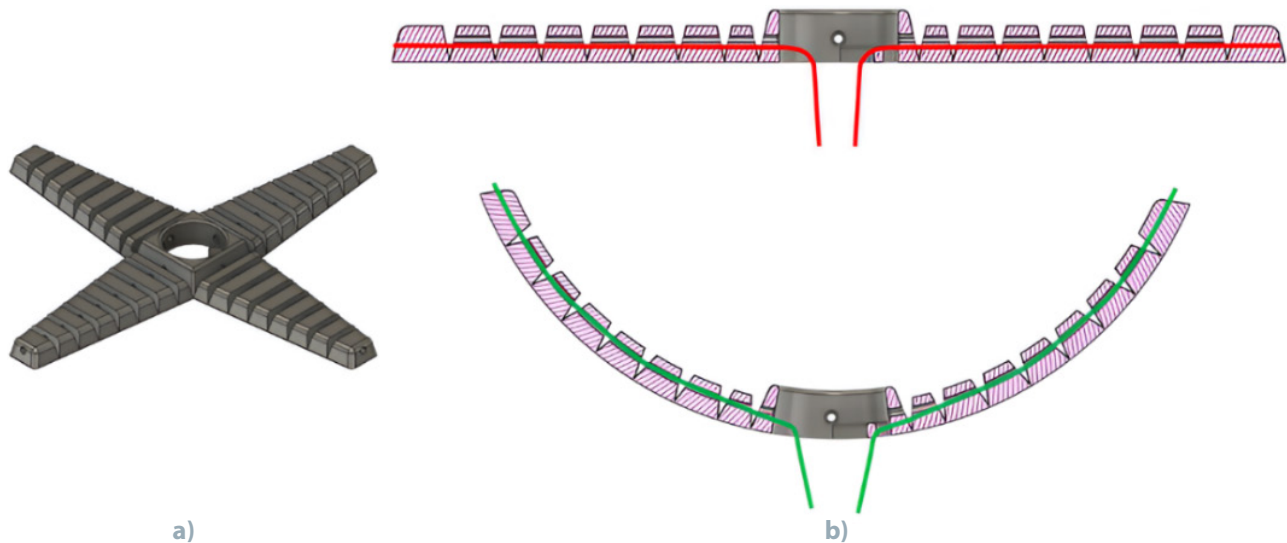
The design of the flexible clamp: a) General design; b) The opening and closing of the system thanks to the nylon thread system
